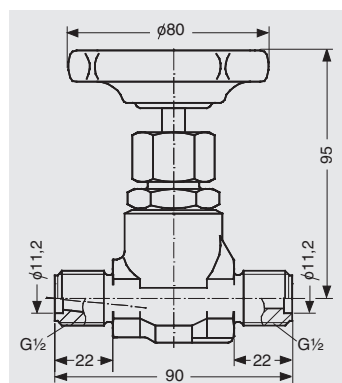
/110 Shut-off valve 7MF9017-1A, dimensions
